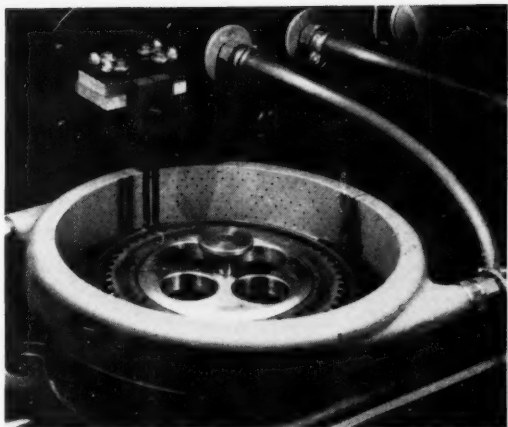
Sketch of a typical spray quench fixture used for hardening spur gears.
